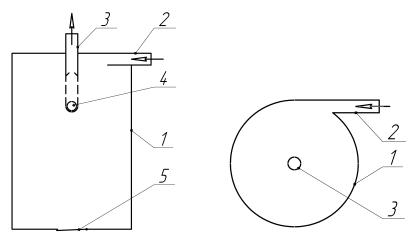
Scheme vacuum container in an upright (left) and transverse (right) sections: 1 - the case; 2 - inlet pipe; 3 - outlet; 4 - Ball valve; 5 - drain cover.
